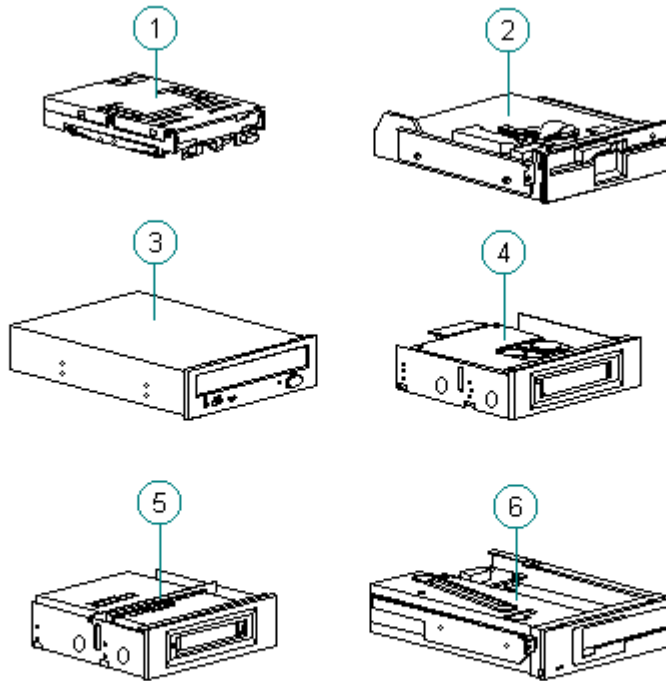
Diskette Drives, CD-ROM Drives, and Tape Drives
